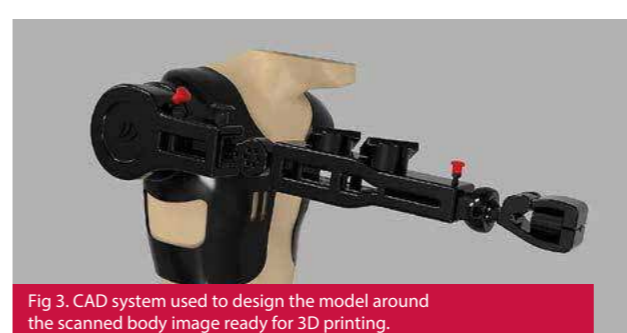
CAD system used to design the model around the scanned body image ready for 3D printing.
